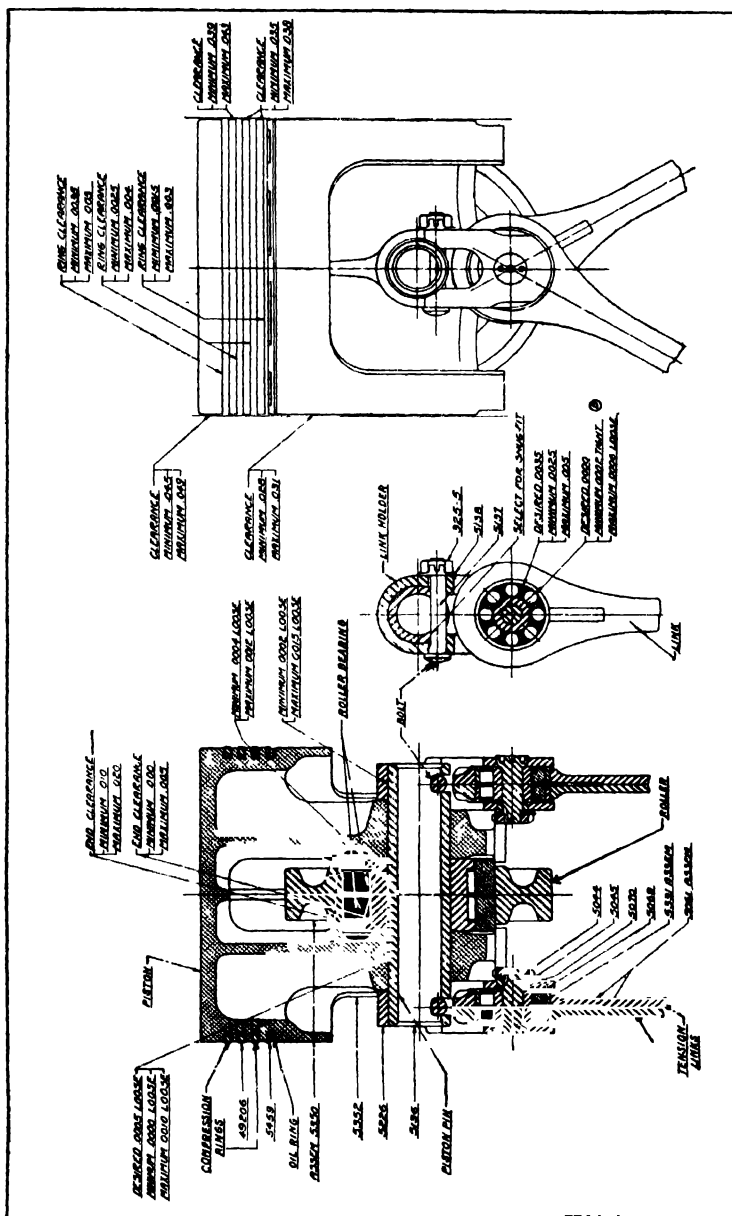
Drawing of Piston and Link Assembly of Fairchild-Caminez Engine Showing Clearances and Construction of Parts.
